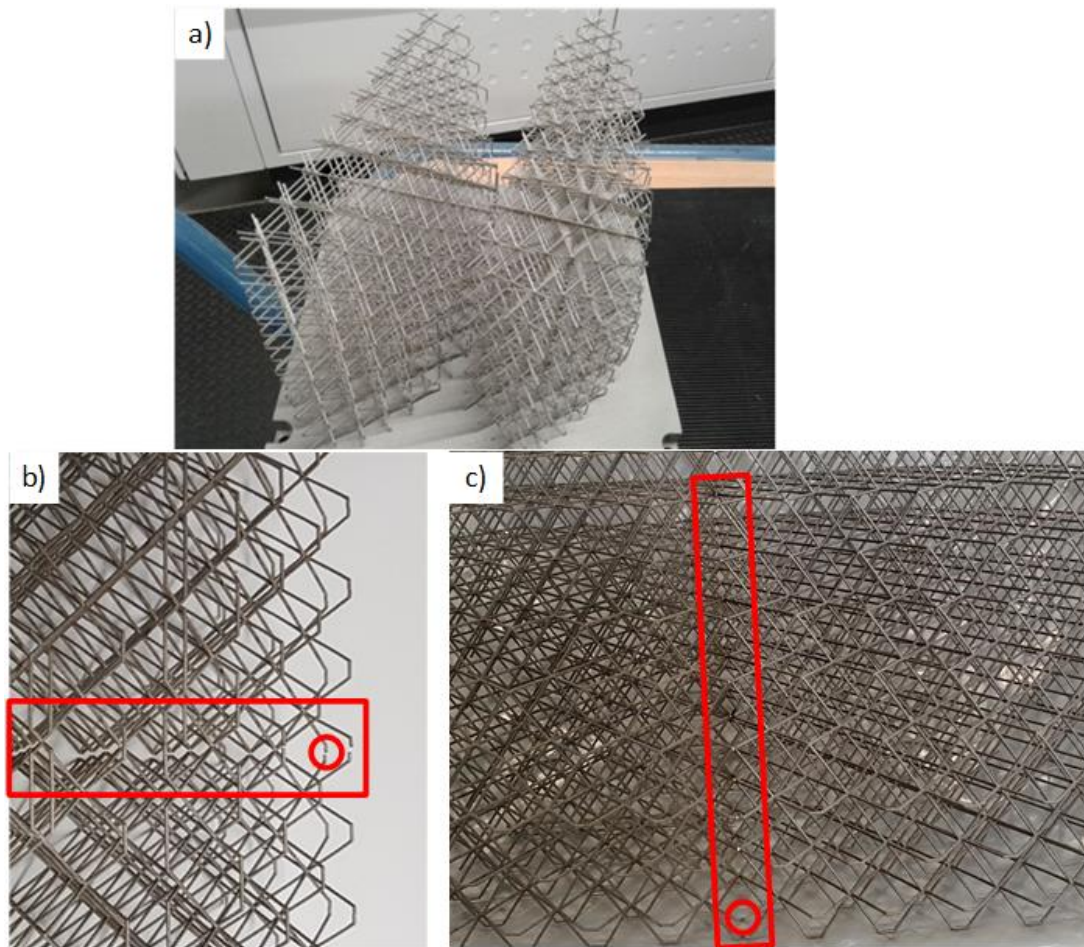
a) Two core halves, b) Lattice bars meeting each other, c) Welded nodes (red rectangle depicts the area of welding, red circle an example of one welding spot).
